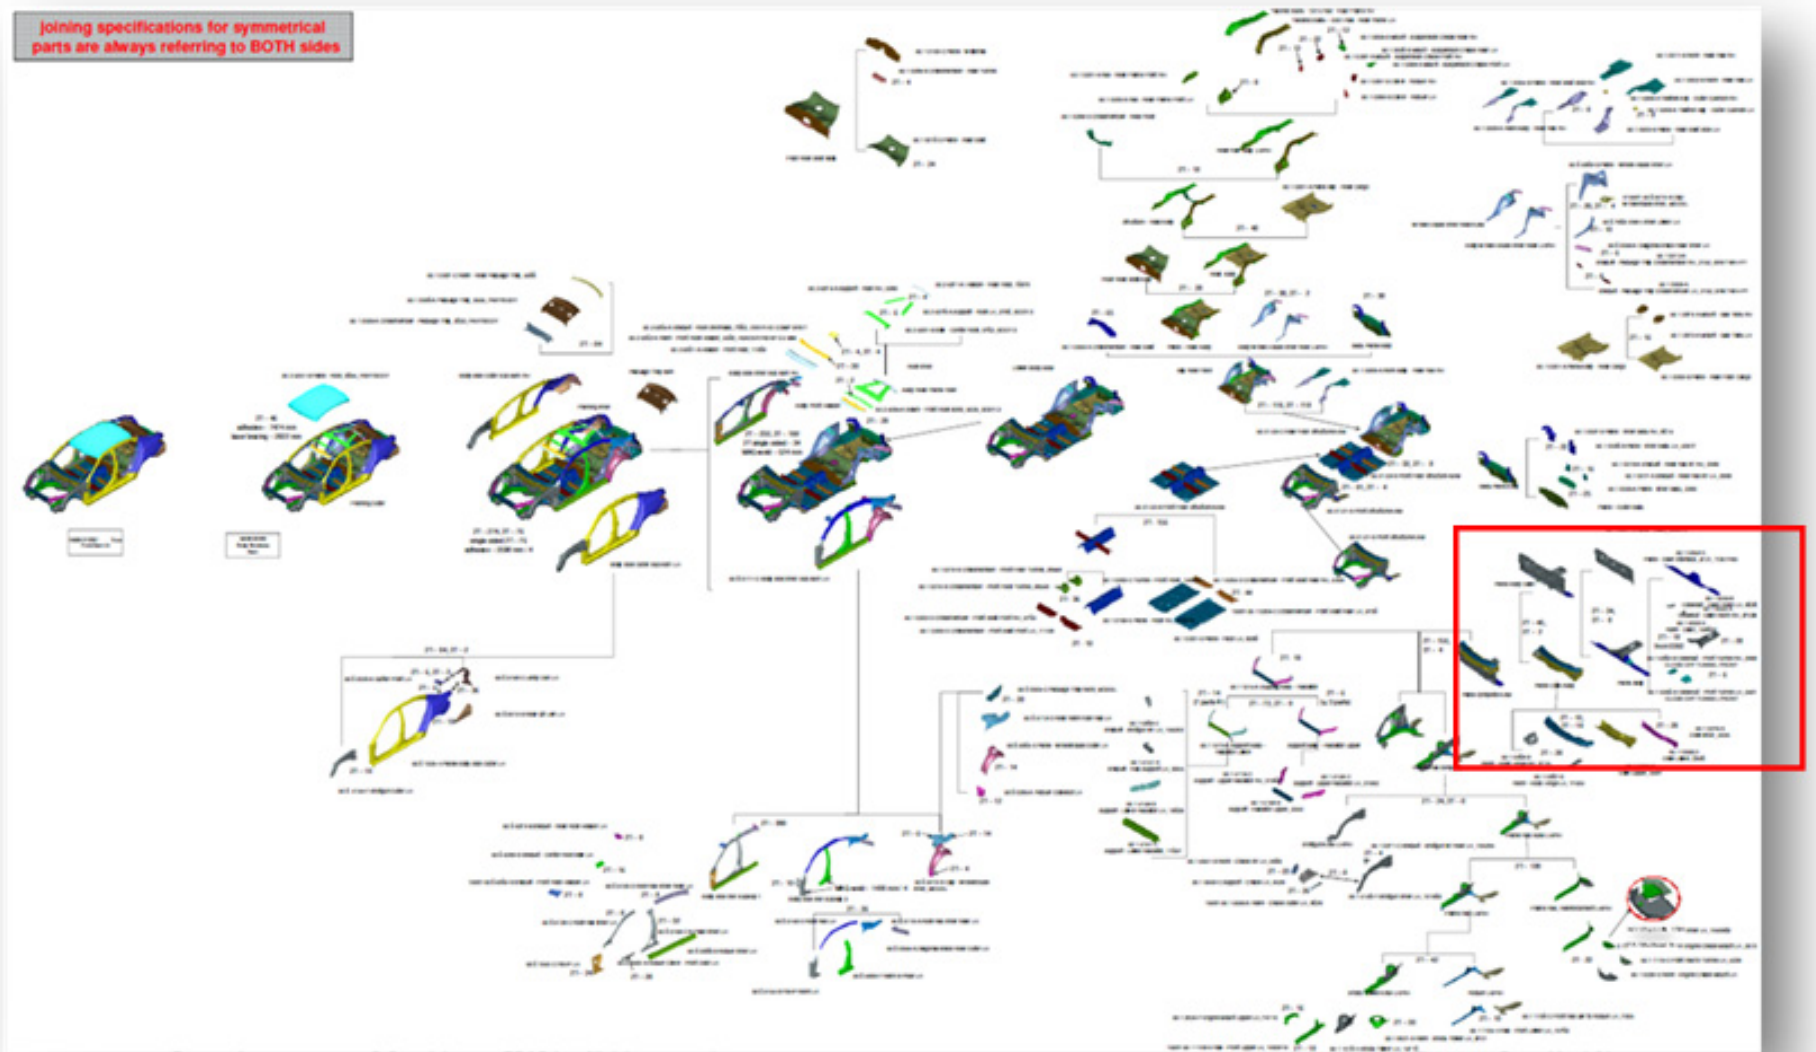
Assembly Tree for the Spot Welded Body Structure
